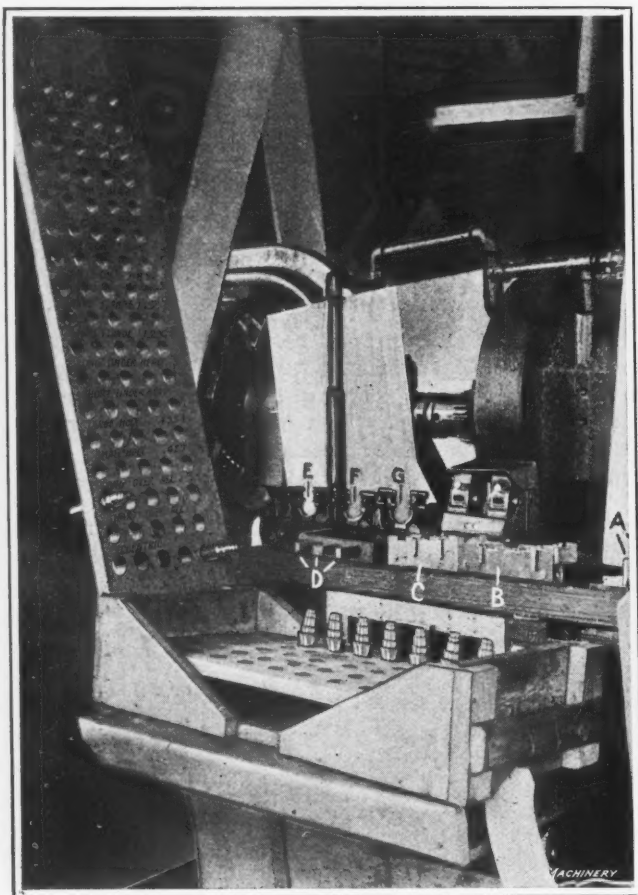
Arrangement of Gages and Rejection Board on Automatic Screw Machine
